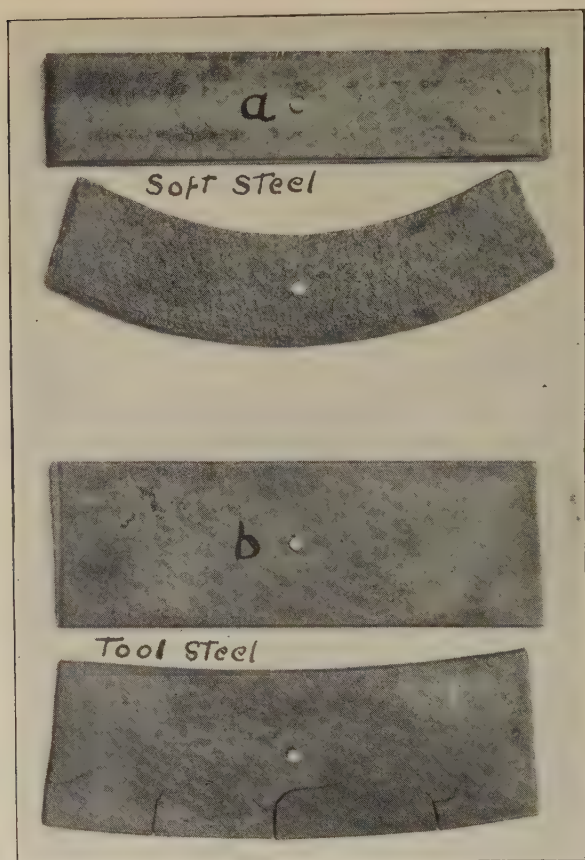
Showing Warpage and Cracking Due to Cooling Lower Half of "a" and "b".
